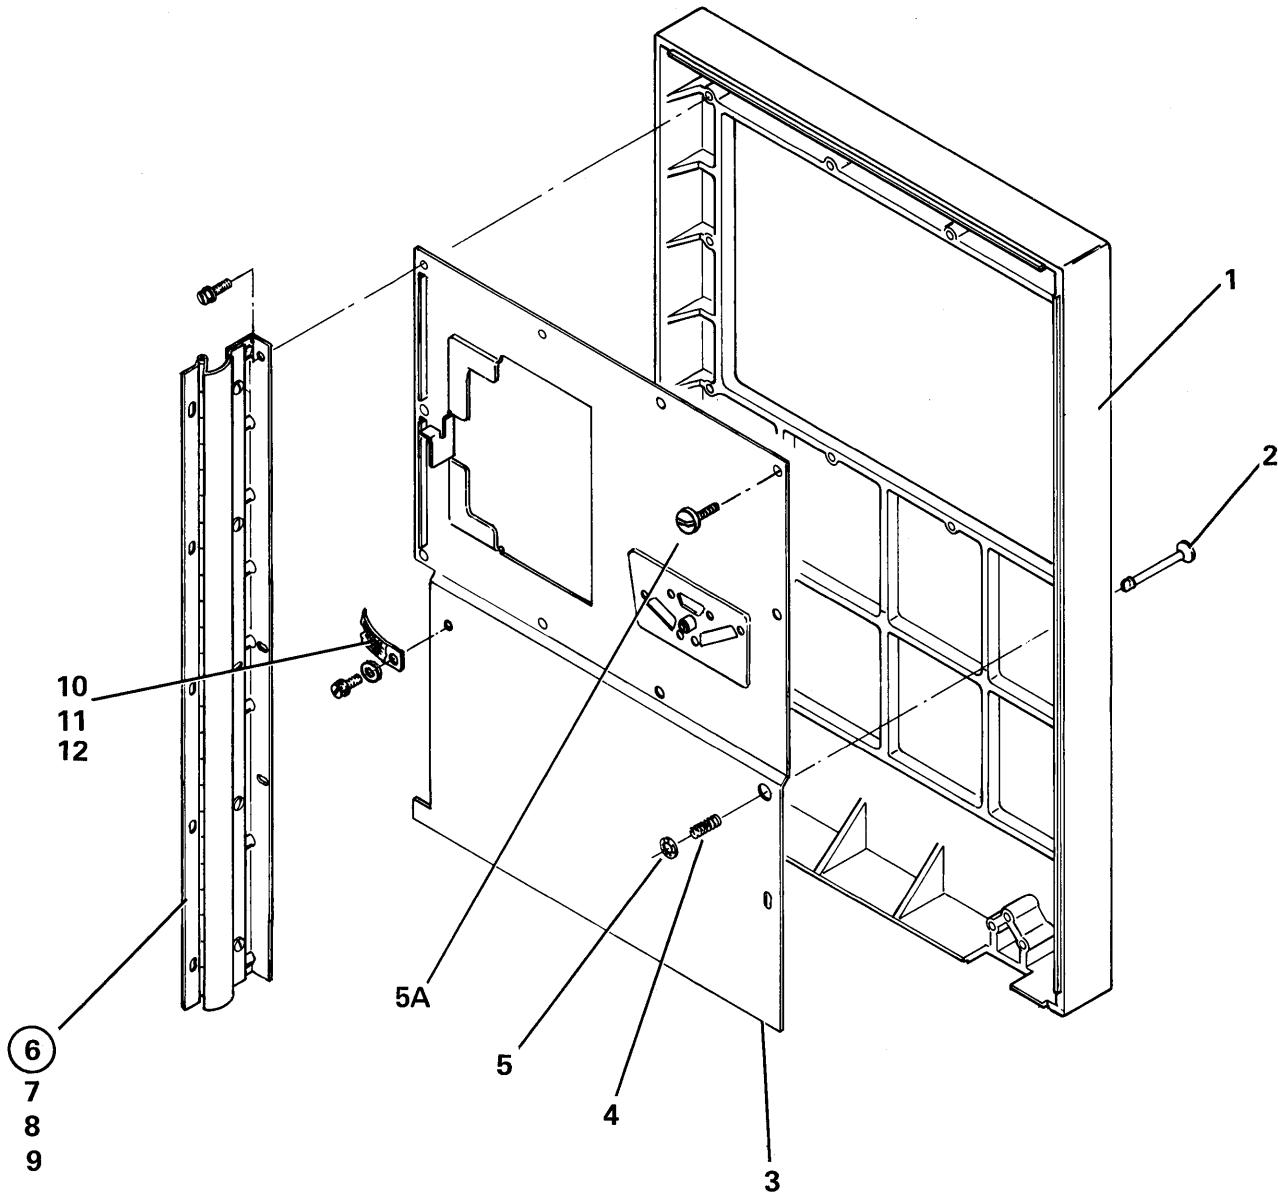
REAR DOOR ASSEMBLY. SEE LIST 3.
